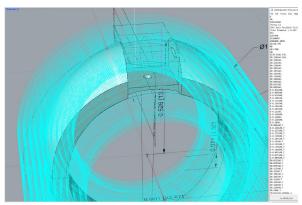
showing the toolpaths in blue needed for a tapered ring shank
